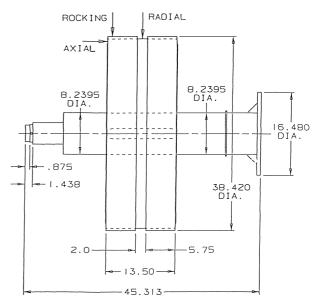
Gear Assembly with Accelerometer Locations to Identify Disc Modes.
